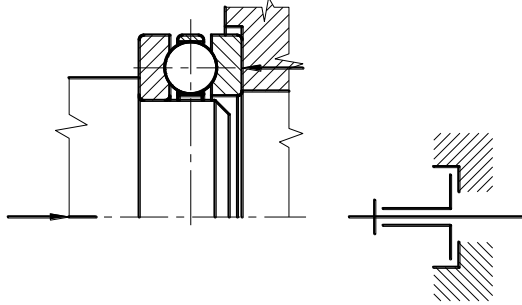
Bearing retaining of a single row thrust ball bearing
